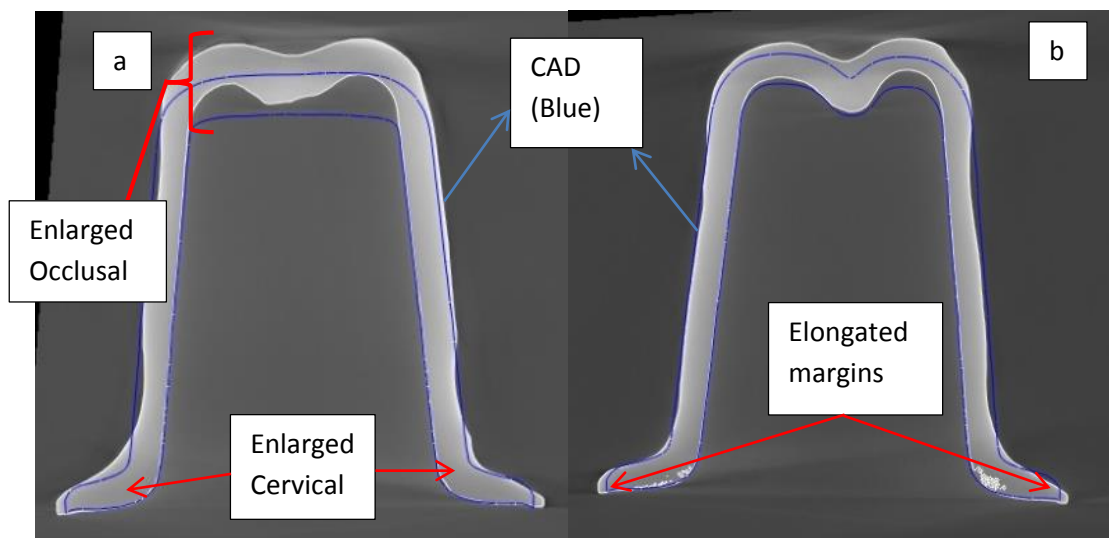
Cross-sectional Overlay of CAD (Blue) and scanned 3-Axis Milled Zirconia coping in micro-CT, a: side view, b: view rotated 90°
